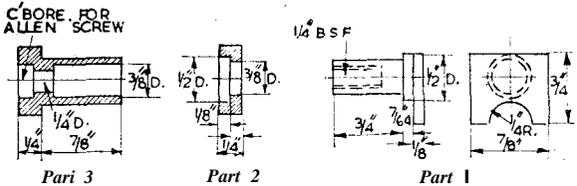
The driving plate, auto traverse drive spindle, spacing pieces and guide plates for the driving pin
